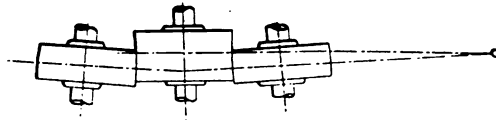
PLAN OF GEARS OF LOCOMOTIVE IN FIG. 1
